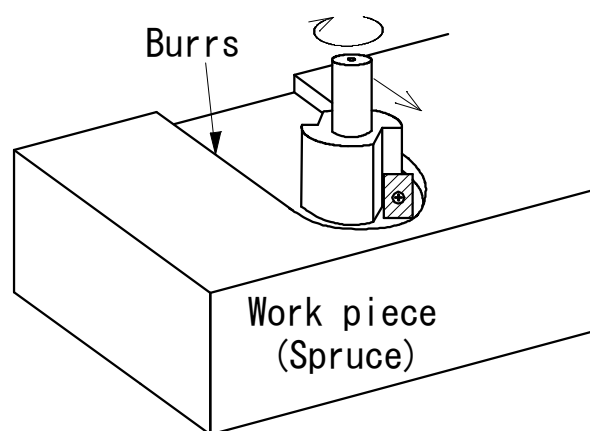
Schematic drawing of the cutting test using router bit and carbide inserts to measure cutting power when cutting Spruce.
